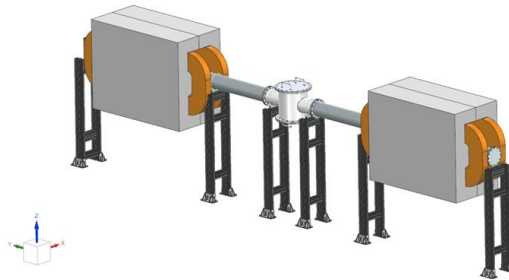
Preliminary CAD model of Lumi Dipole system assembly
